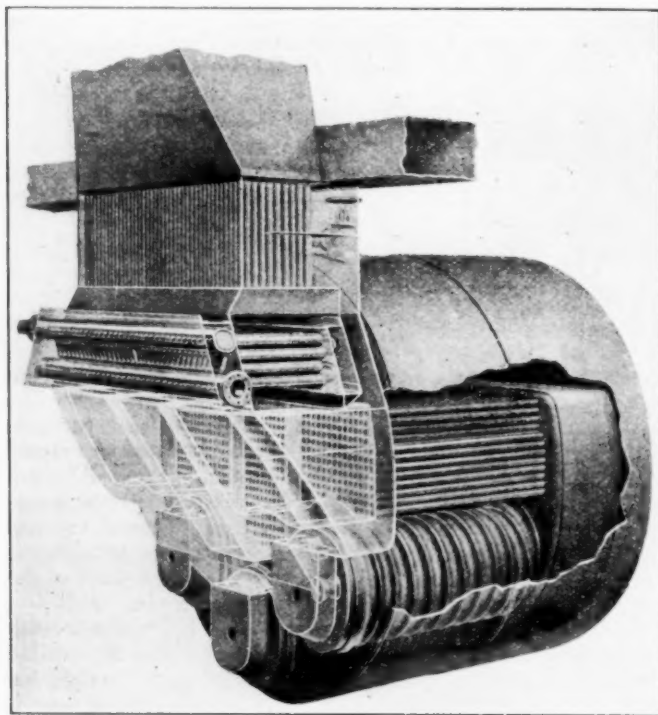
FOSTER SUPERHEATER IN SCOTCH MARINE BOILER UTILIZING WASTE HEAT
